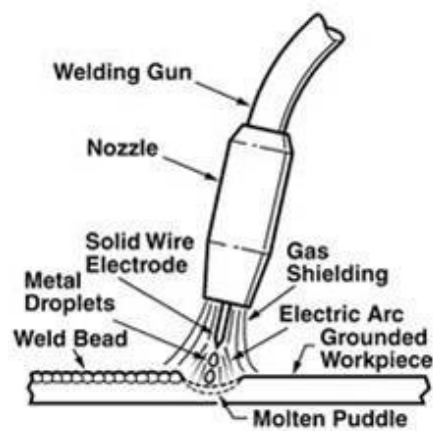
Schematic of gas metal arc welding process (adapted from (Groover, 2013))
